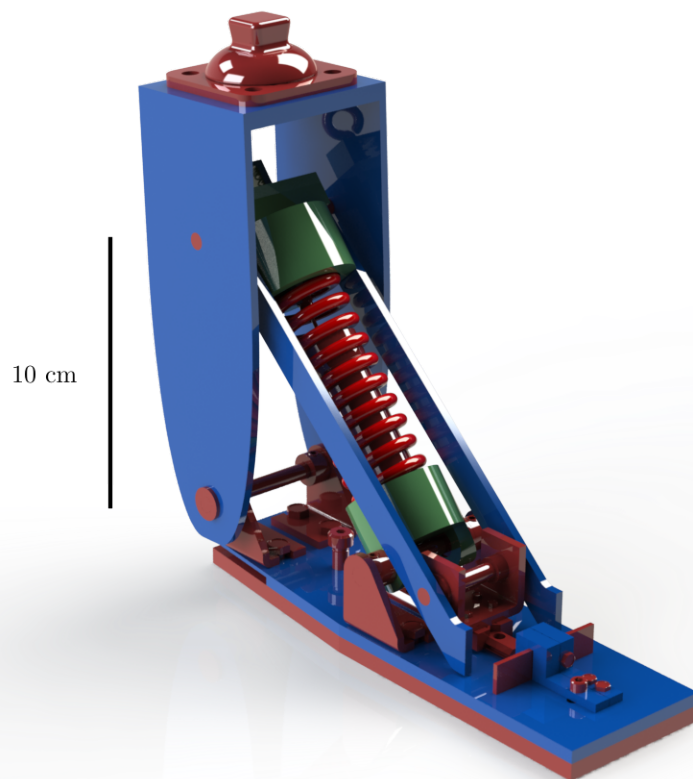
Various manufacturing techniques used: waterjetting (blue), stock parts (red), and CNC milling (green).
